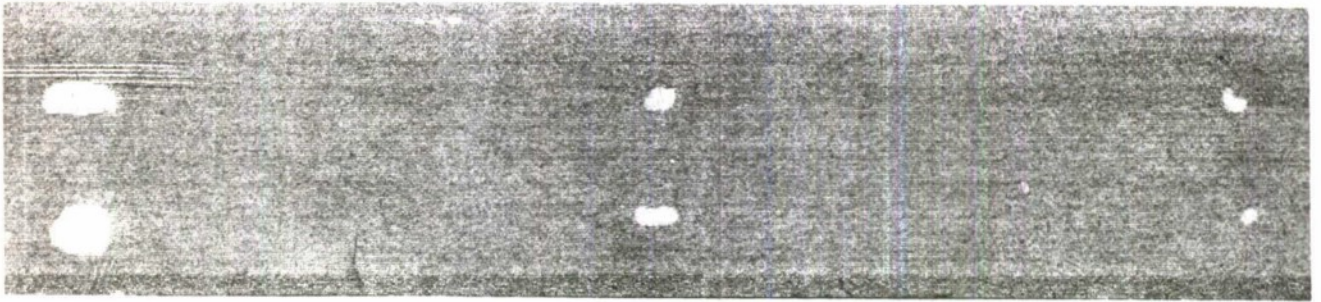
Unbond standards developed for C-scan inspection tests using Grafoil disks
